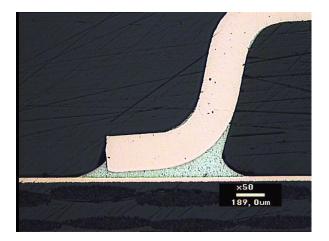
50x Magnified Optical Microscope Image of a Well Soldered SOIC Lead Based on a Robust Pad Design
